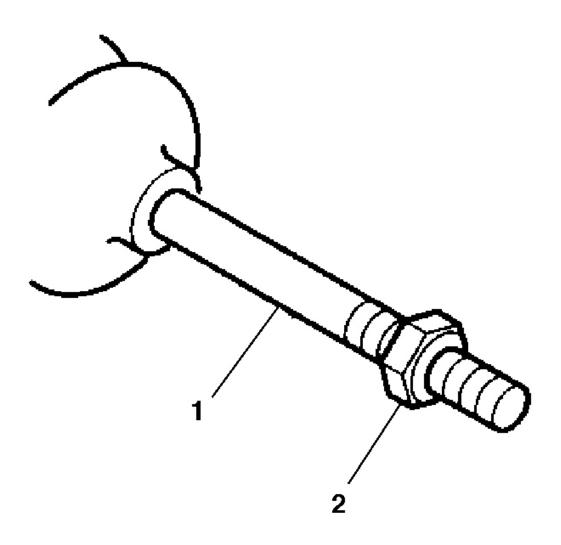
Identifying Inner Tie Rod Assembly Jam Nut Courtesy of GENERAL MOTORS CORP.
